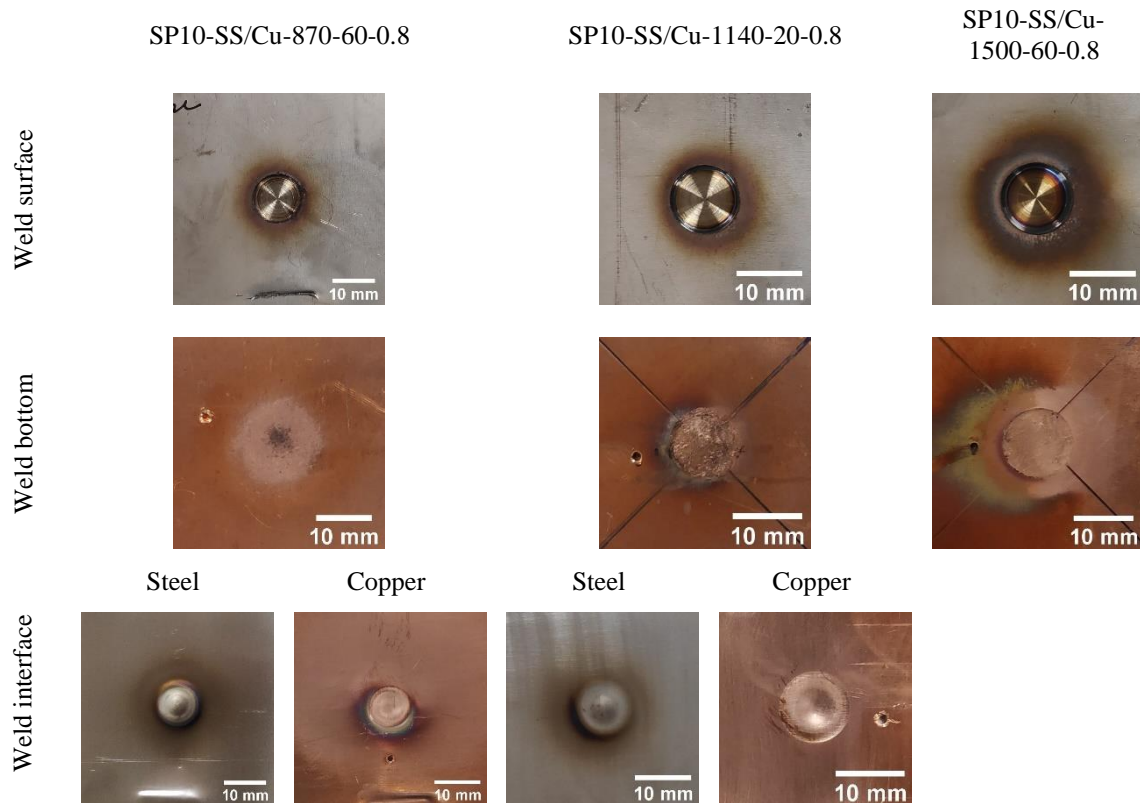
Weld surface, bottom, and interface from SP10-SS/Cu-870-60-0.8, SP10-SS/Cu-1140-20-0.8, and SP10-SS/Cu-1500-60-0.8 welds.
